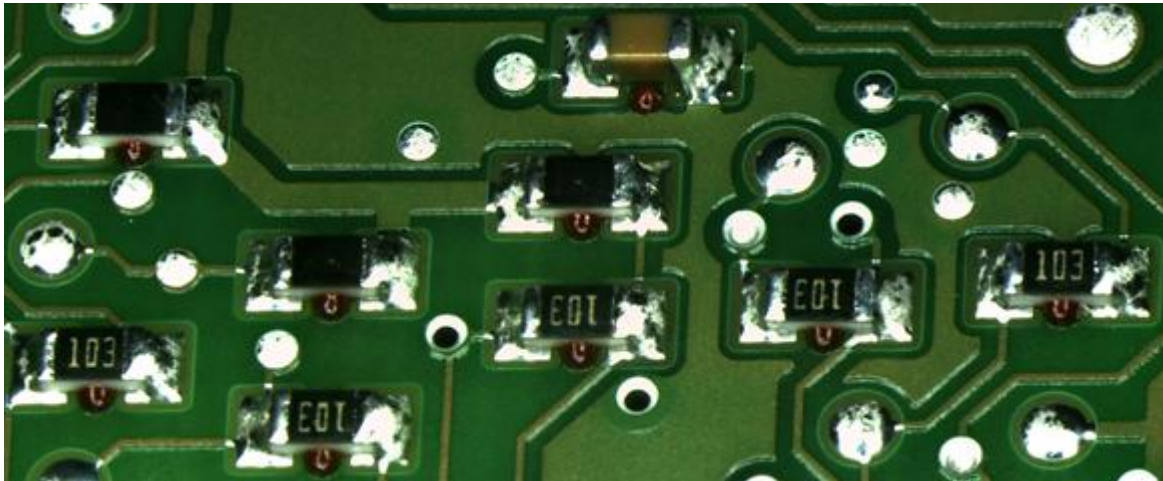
SMD components fixed with an adhesive on the face B of the PCB.
